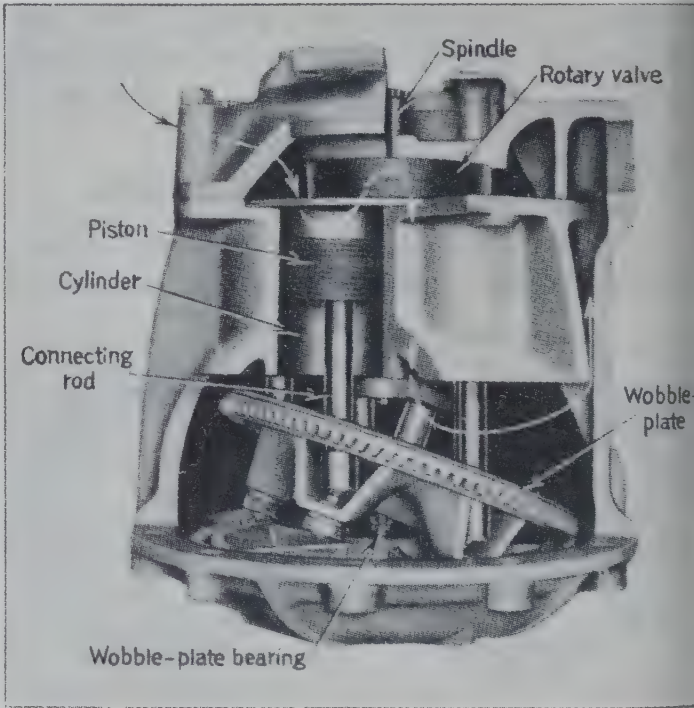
Cutaway view of wobble-plate piston meter. (Bowser, Inc.)
